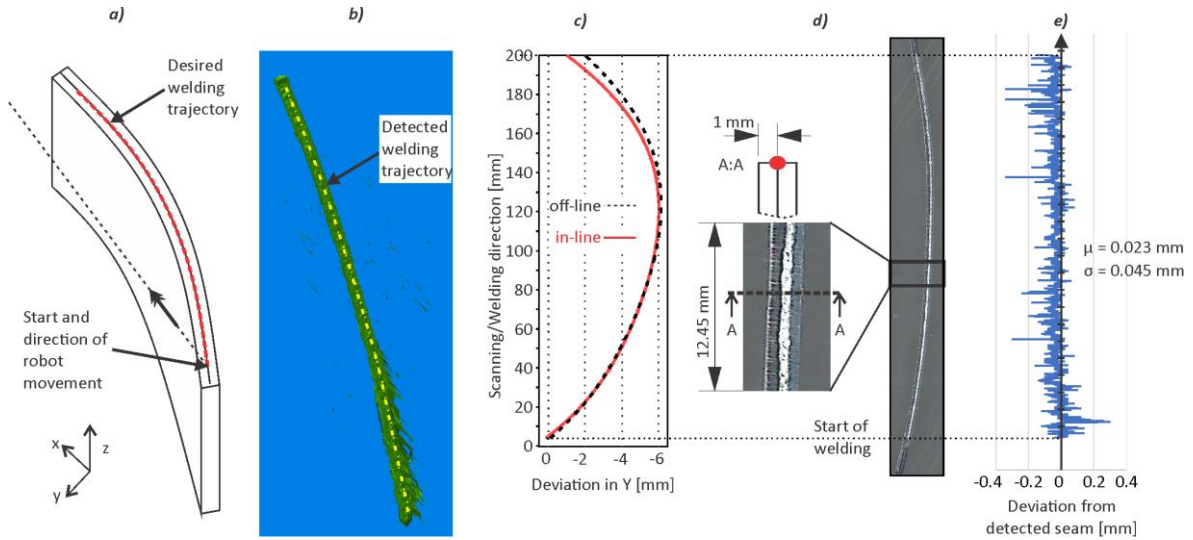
Schematic presentation of welding situation of flat edge seam (a). 3D measurement and detected welding trajectory (b). Comparison between off-line (black) and in-line (red) measured trajectories (c). Welding results of the scanned flat edge seam (d). The deviation between the weld center and in-line measured trajectory along entire weld (e).
